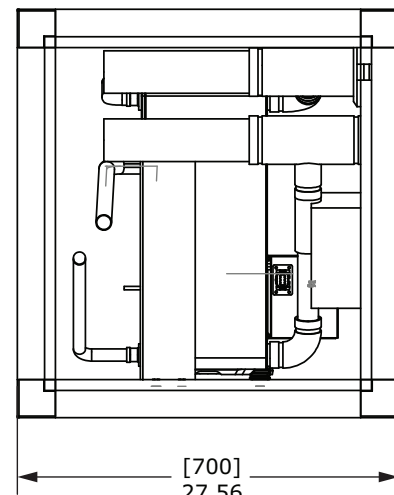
Variable speed compressor assembly footprint (in mm/inches)
